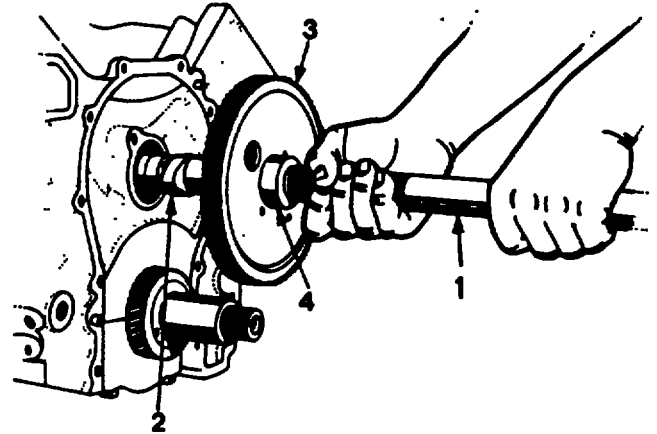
Installing Camshaft, Gear and Spacer as an Assembly
